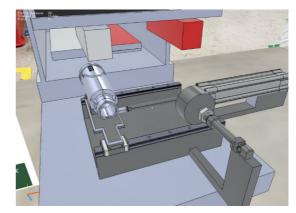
View of the machine along with the filter fixed on the fixture in virtual reality before the second print.
